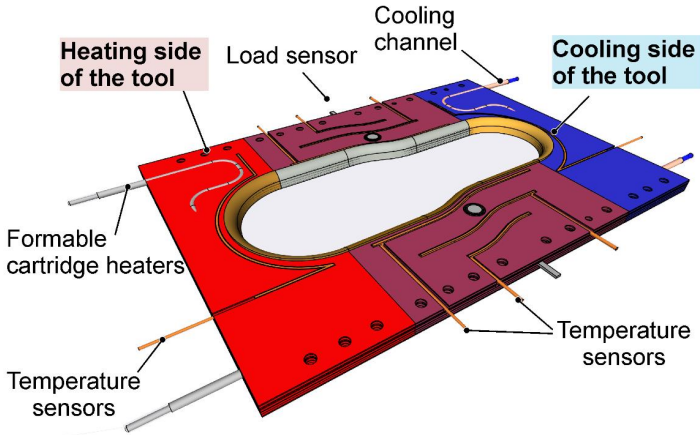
Smart tooling concept for deep drawing die (the cover sheets are removed for a better understanding of the channels and sensors' positions)
